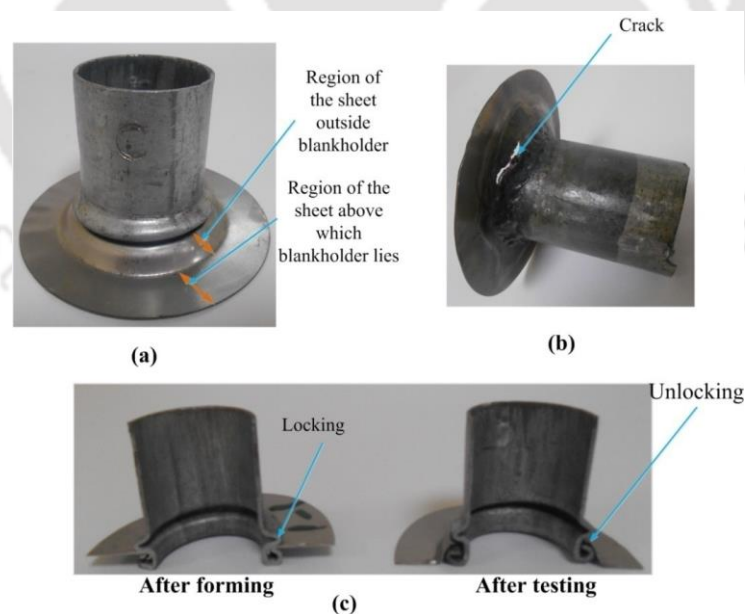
Tested samples of (a) end formed joint, (b) welded joint, (c) sectioned view of end formed joints before and after pull-out tests
